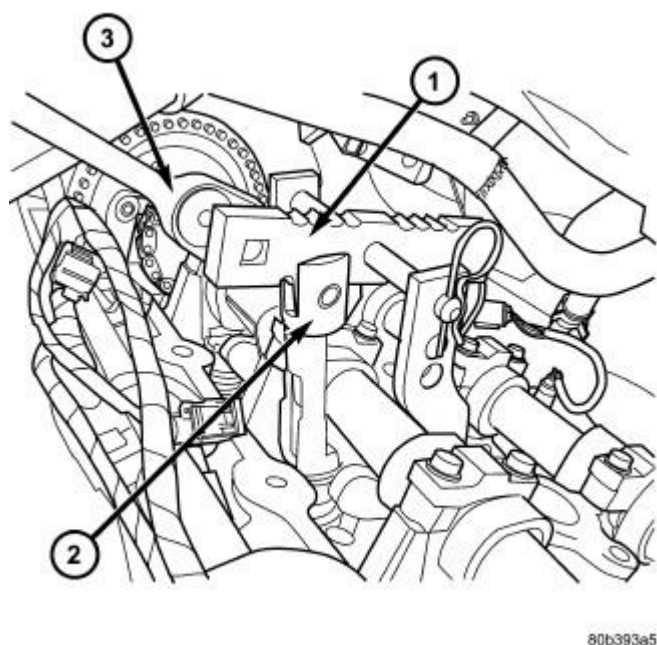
Rocker Arm - Removal/Installation - 2.7L
